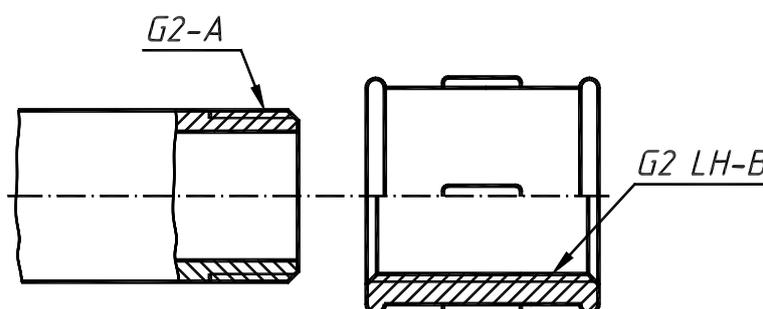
The conventional drawing of a pipe cylinder thread:
